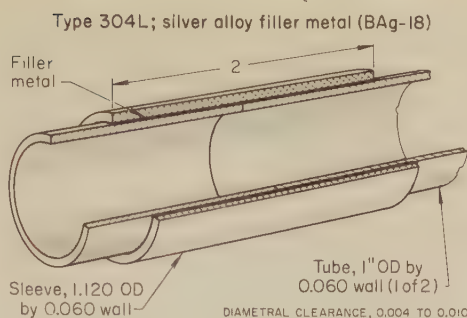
Assembly that was torch brazed with a silver alloy filler metal containing no zinc or cadmium, because of use of the brazement in a high-vacuum system (Example 615)
